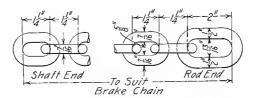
M. C. B. Standard Brake Chain. (M. C. B. Sheet 23A.)
